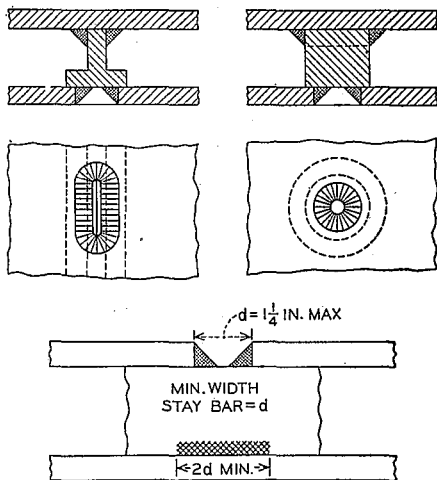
USE OF PLUG AND SLOT WELDS FOR STAYING PLATES
